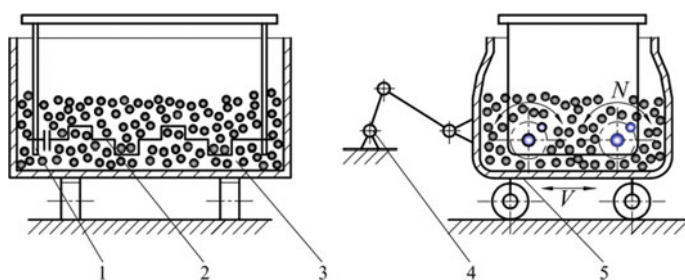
Principle diagram of horizontal spindle barrel finishing. 1—Gearing; 2—crankshaft; 3—machining medium; 4—driven mechanism; 5—slot barrel
